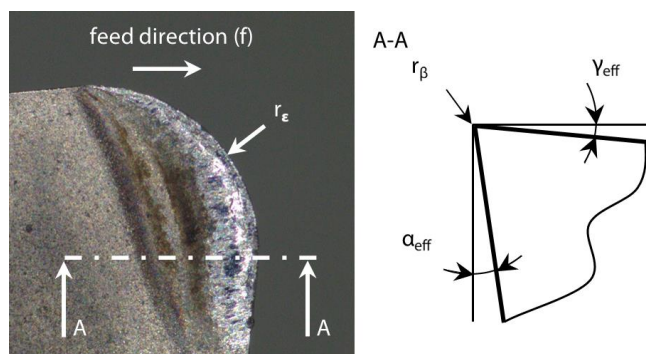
Geometry of cemented carbide cutting insert CNGP 120408
